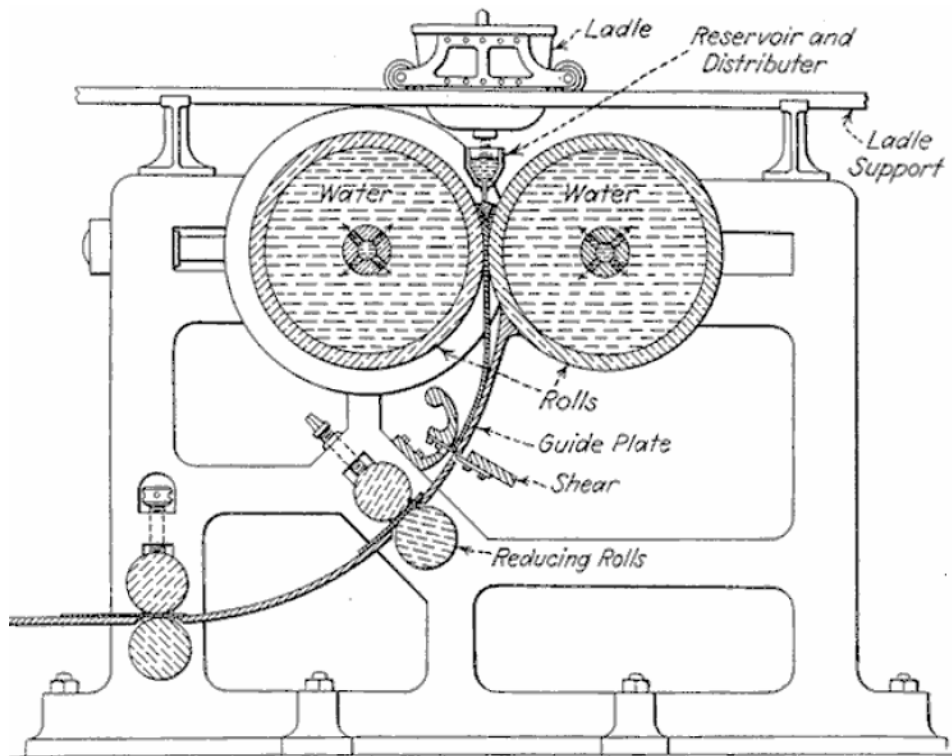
Bessemer's twin roll caster for steel sheet production [16]
